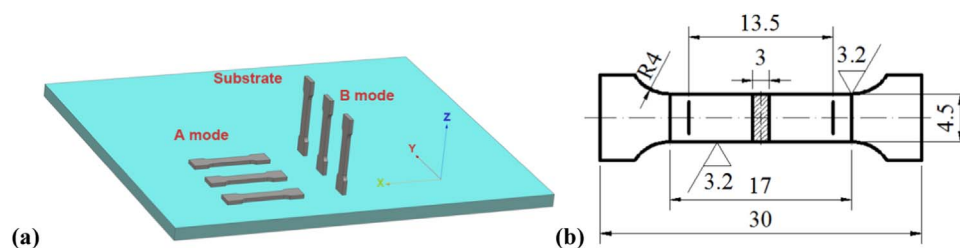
(a) 3D view of the tensile test specimens: A horizontal build-up; B vertical build-up. Geometry of SLM processed sample for tensile testing (b).
